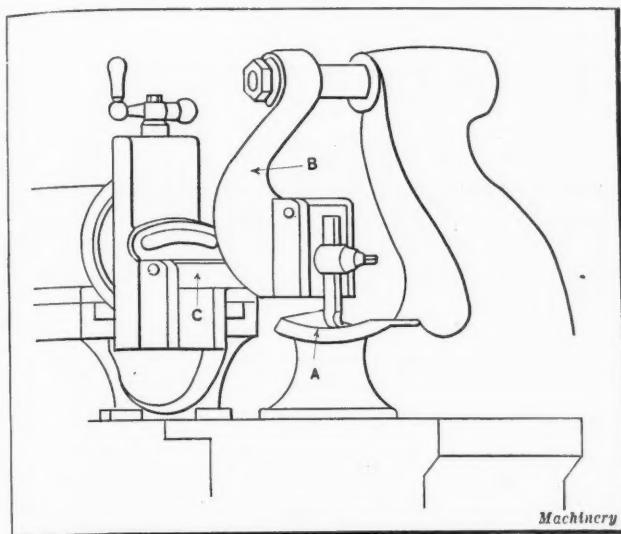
Radius Planing Attachment for Use on a Crank Shaper
